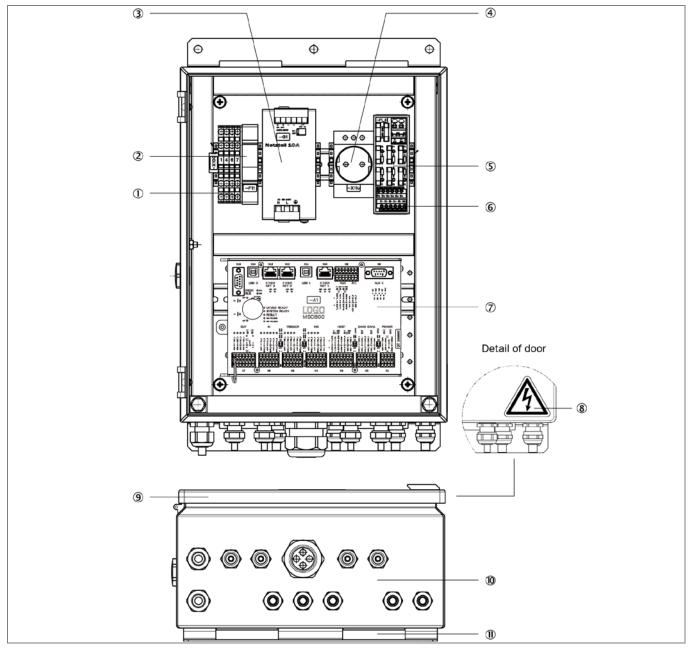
MSC800-1100 device view (internal view with open door and view from below)
